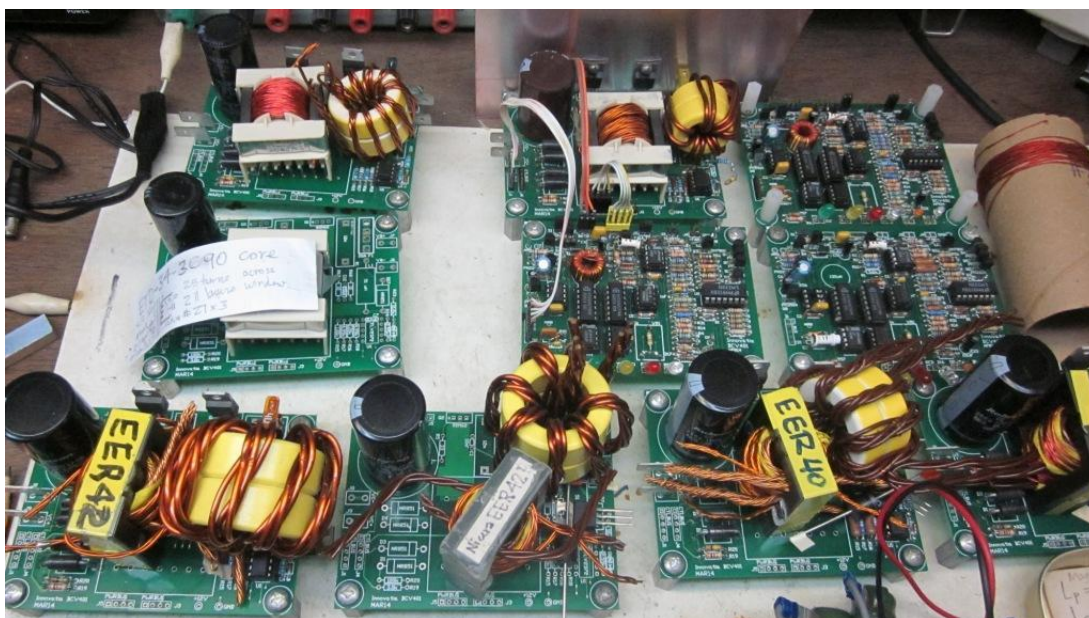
A closer view of the prototype power-transfer boards. Several sizes of transformer and inductor designs are shown, including EER40 and EER42 transformers. All these prototype magnetics parts are wound by hand and could be rebuilt in the field without winding equipment. The inductors could be shrunk in size using higher-price cores.
